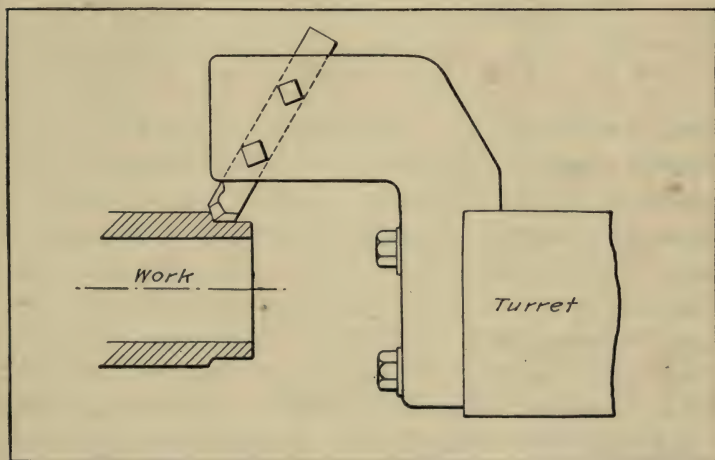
A SIMPLE FORMING TOOL FOR TURRET LATHE WORK
